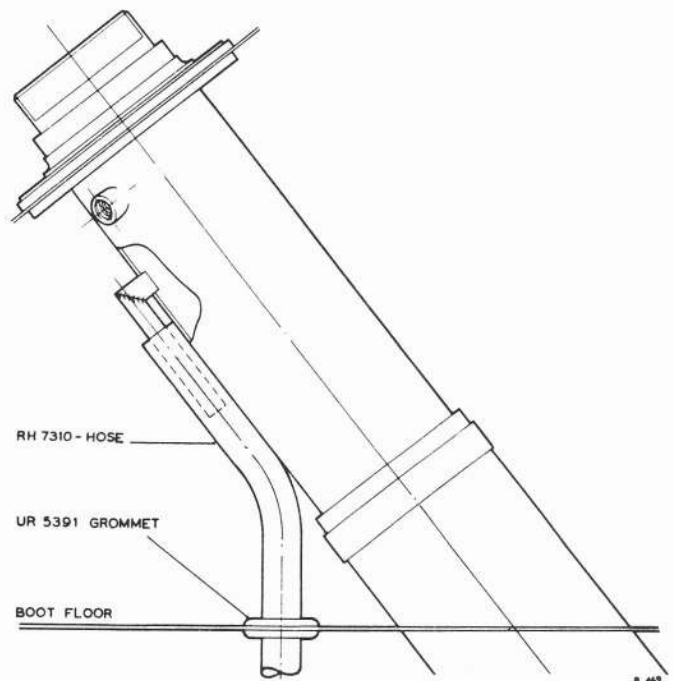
Positioning of rubber hose on filler tube vent pipe.
